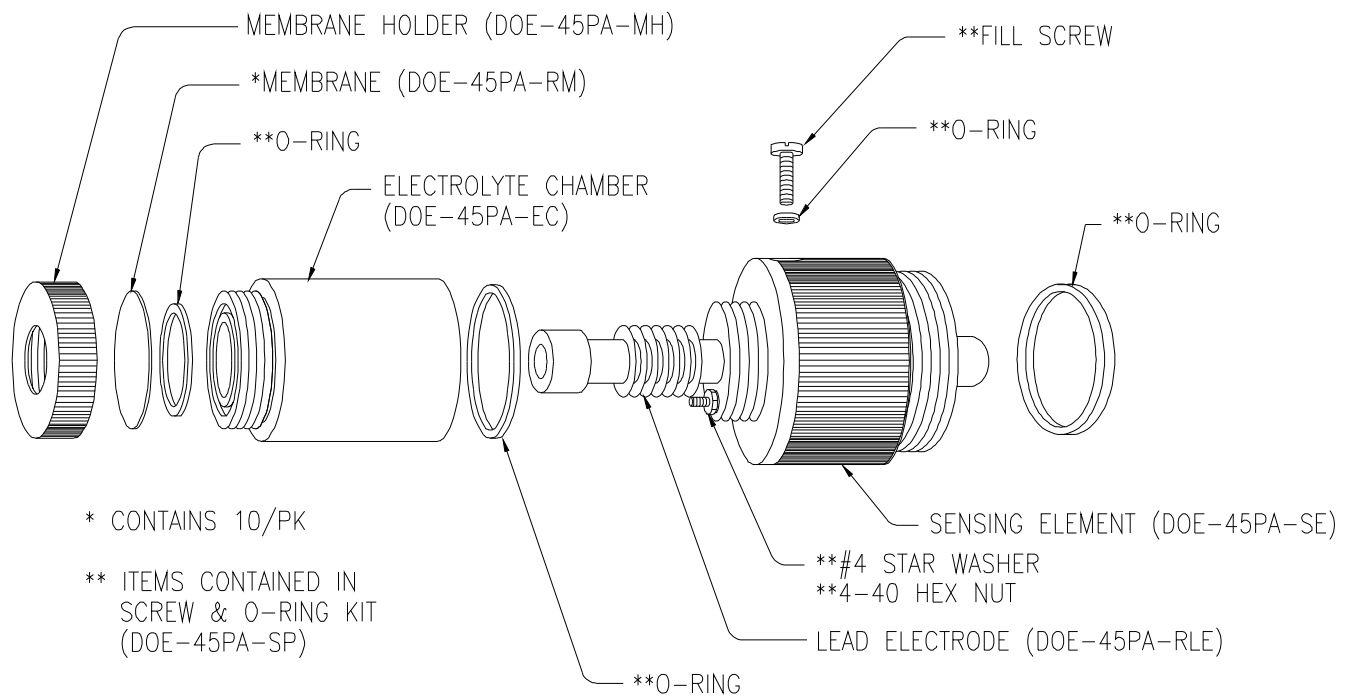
SUBMERSIBLE D.O. SENSING MODULE ASSEMBLY
